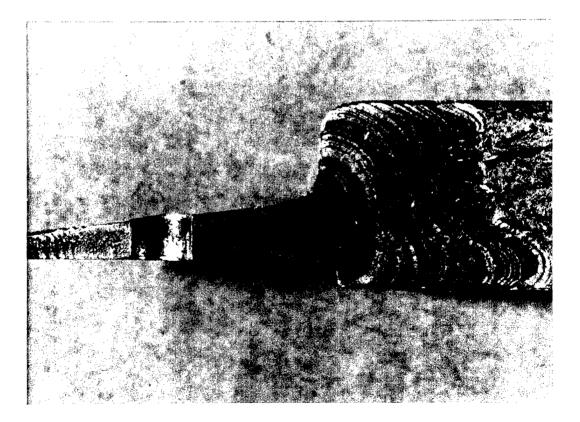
"Beach Marks" Identify Progressive Fatigue Failure (See Section 2.8)
